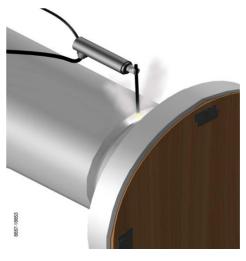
Protection during welding Figure 23: Retaining circlip
